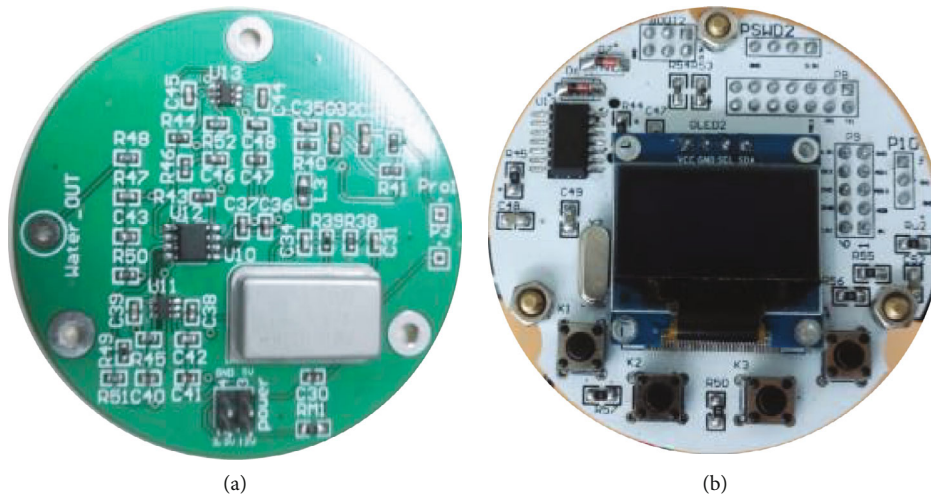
PCB of TCSWR sensor: (a) sensor measurement motherboard; (b) sensor acquisition motherboard.
